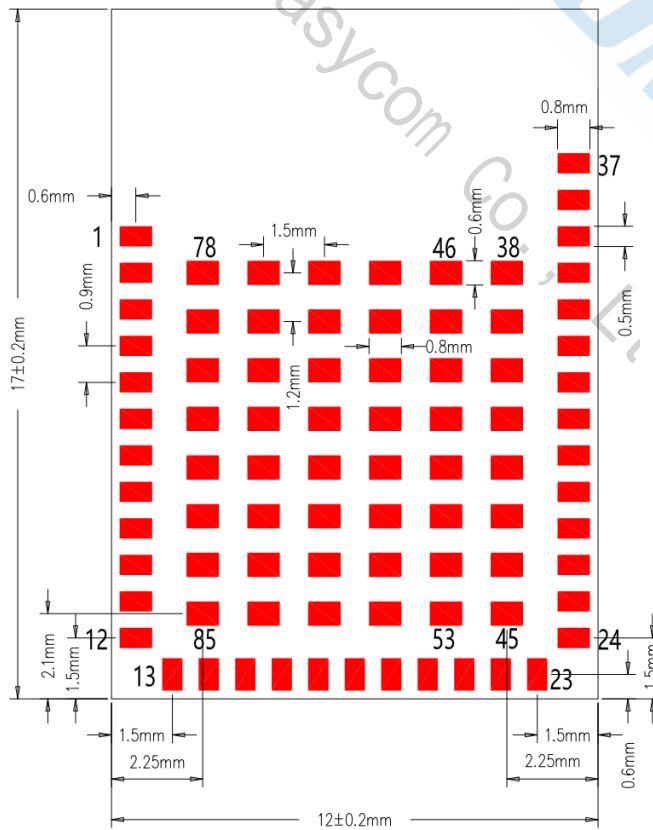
FSC-BT1104QI footprint Layout Guide (Top View)
